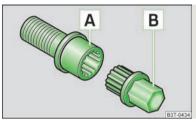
Principle sketch: Anti-theft wheel bolt with adapter
